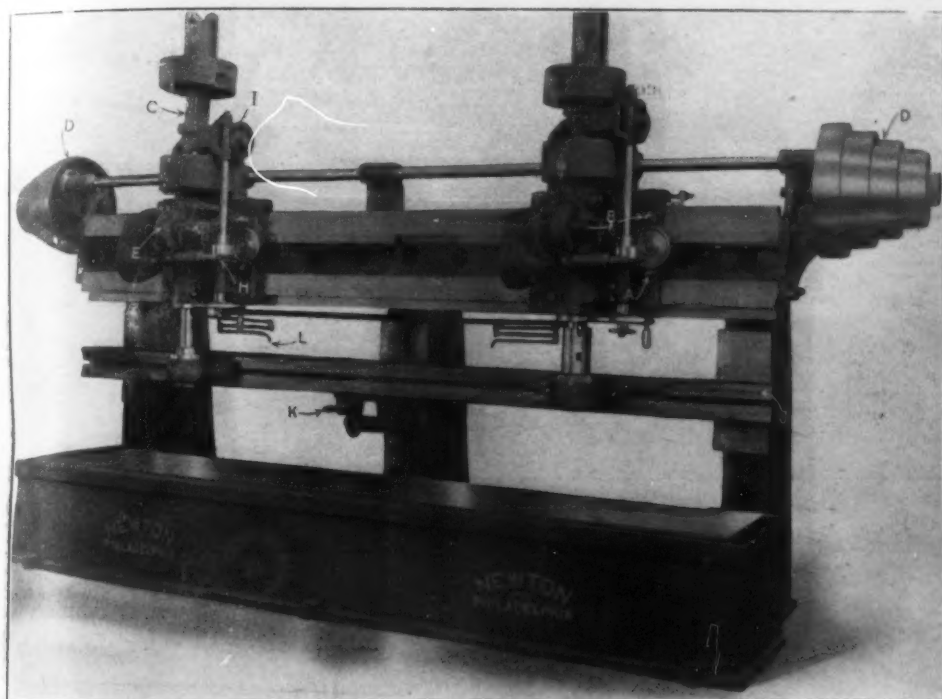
A Special Duplex Machine for Boring Rods Built by the Newton Machine Tool Works, Inc., Philadelphia, Pa.
